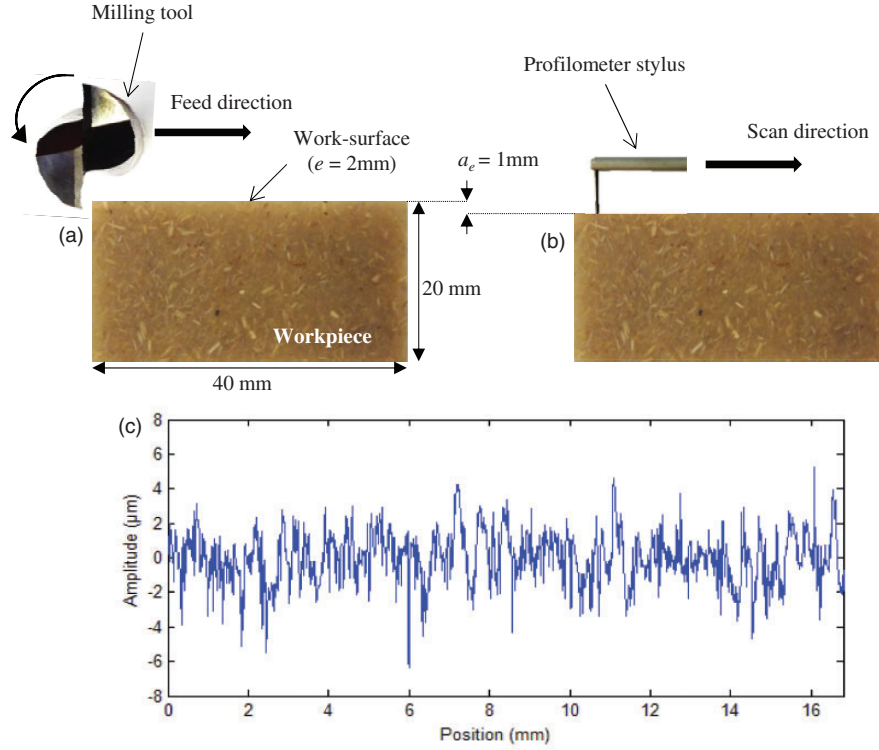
(a) Profile milling operation, (b) surface topography measurement and (c) typical machined surface topography signal for bamboo FRP at $f_z = 0.12$ mm/tooth.
